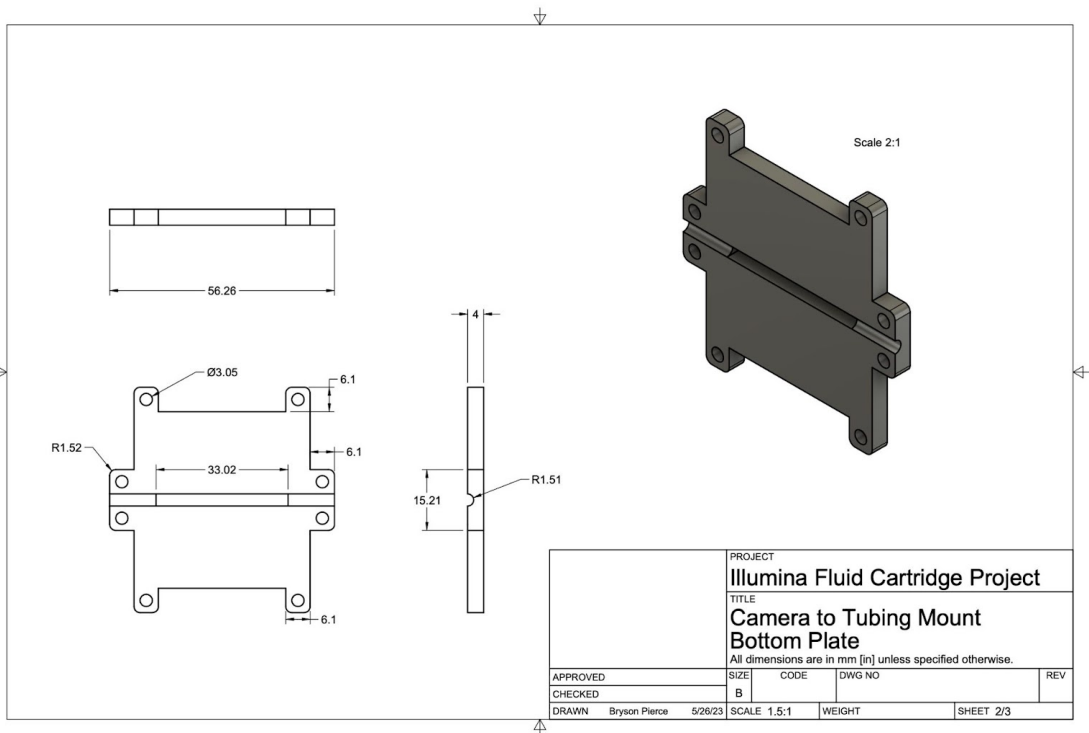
Technical drawing of the bottom plate component of the tubing mount. This connected to the “connector” component and clamped the tubing with the top plate, as drawn in Figure 4c. Can be seen in clearer detail in Appendix C.
